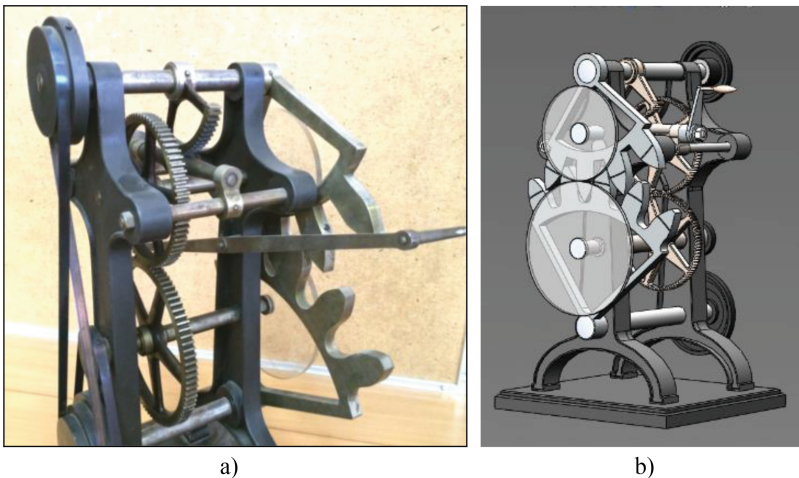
TMM device for studying an involute gearing (a) and its 3D- model (b)
